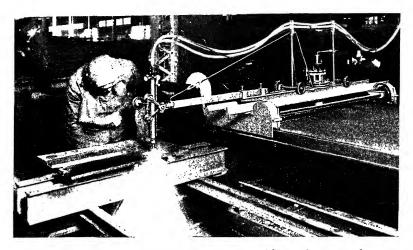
Automatic oxy-acetylene cutting machines shape steel parts quickly and economically.
